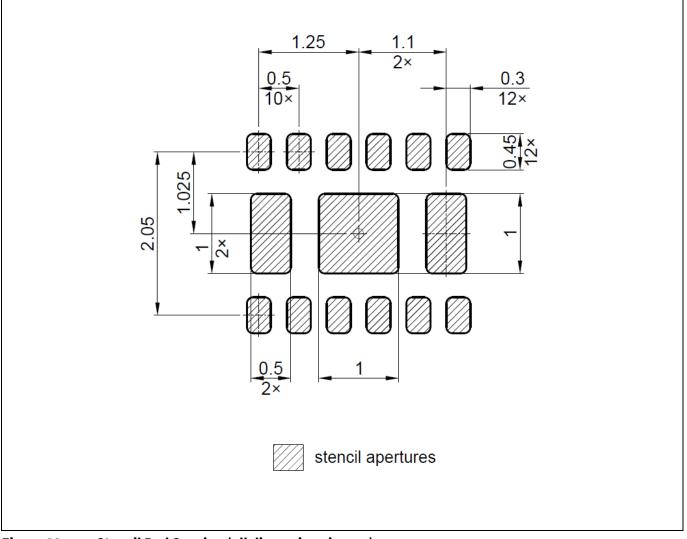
Stencil Pad Spacing (all dimensions in mm)
